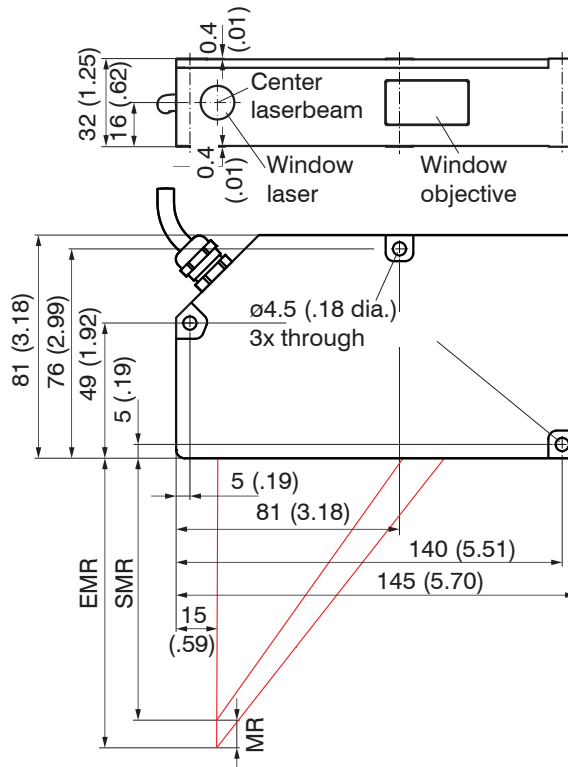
Sensor dimensions, measuring ranges: 40/200/500 mm, dimensions in mm (inches), not to scale
